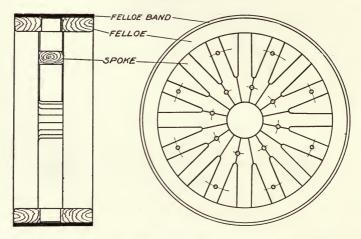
Mogul Wheel Spoke, Felloe and Felloe Band Assembly.
